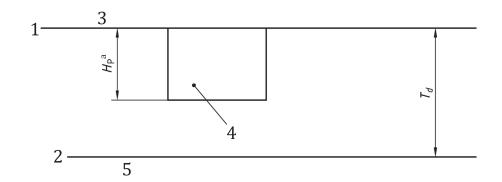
Simple pitch diameter indicating thread gauges with radius roll for internal threads
